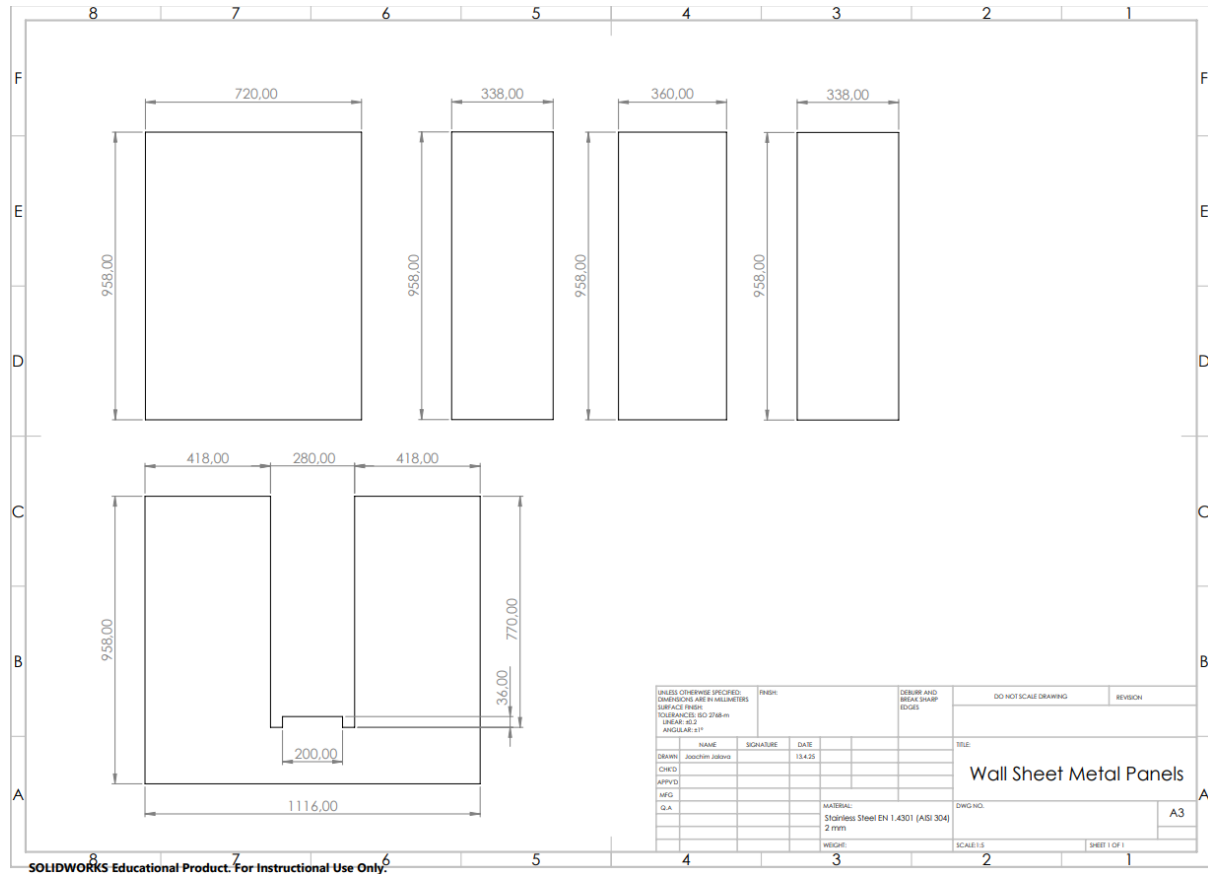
Combined drawing of wall sheet metal panels used for documentation and visual reference.
